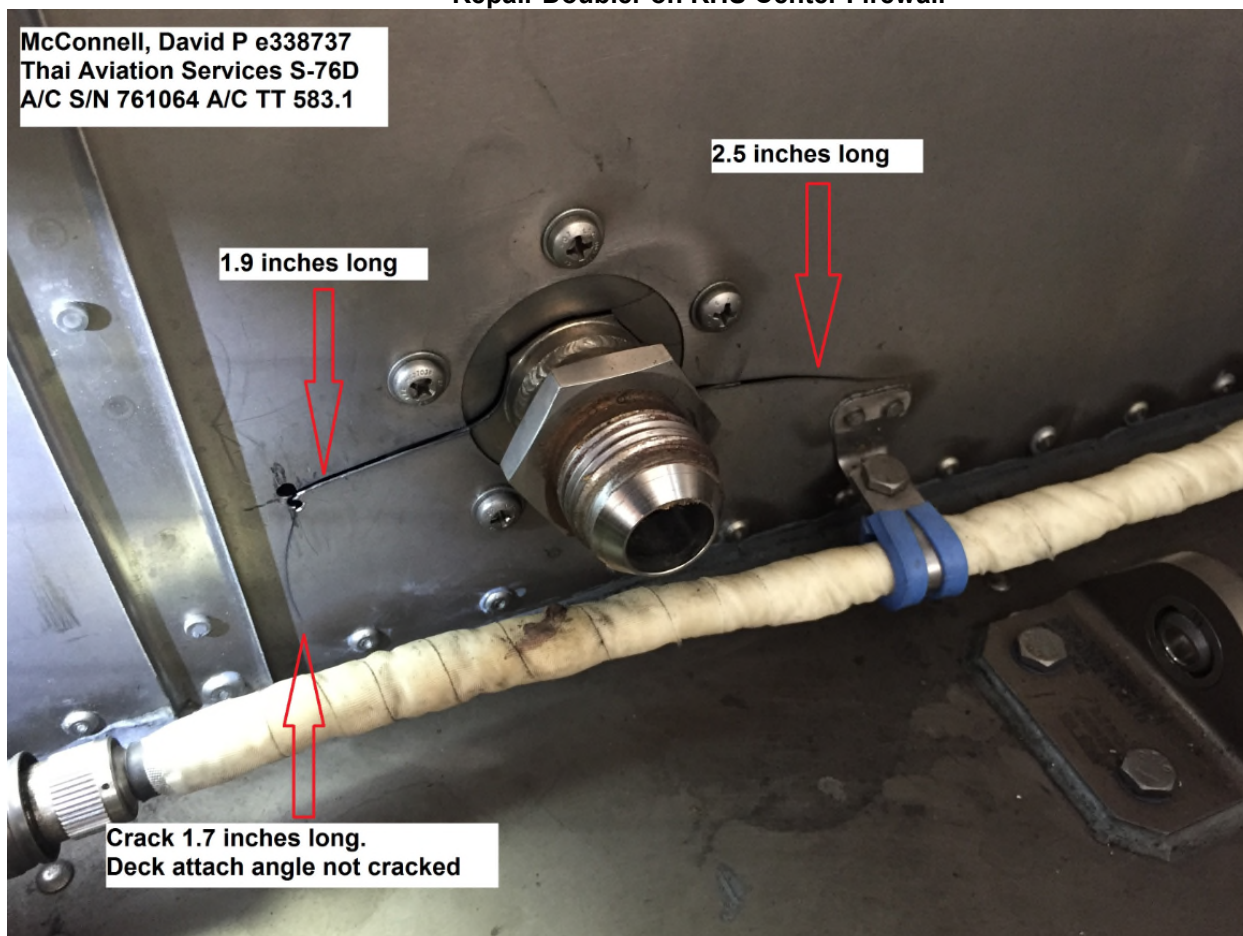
No. 2 Engine Bay Firewall Crack at Y-Pipe Pass-Through
